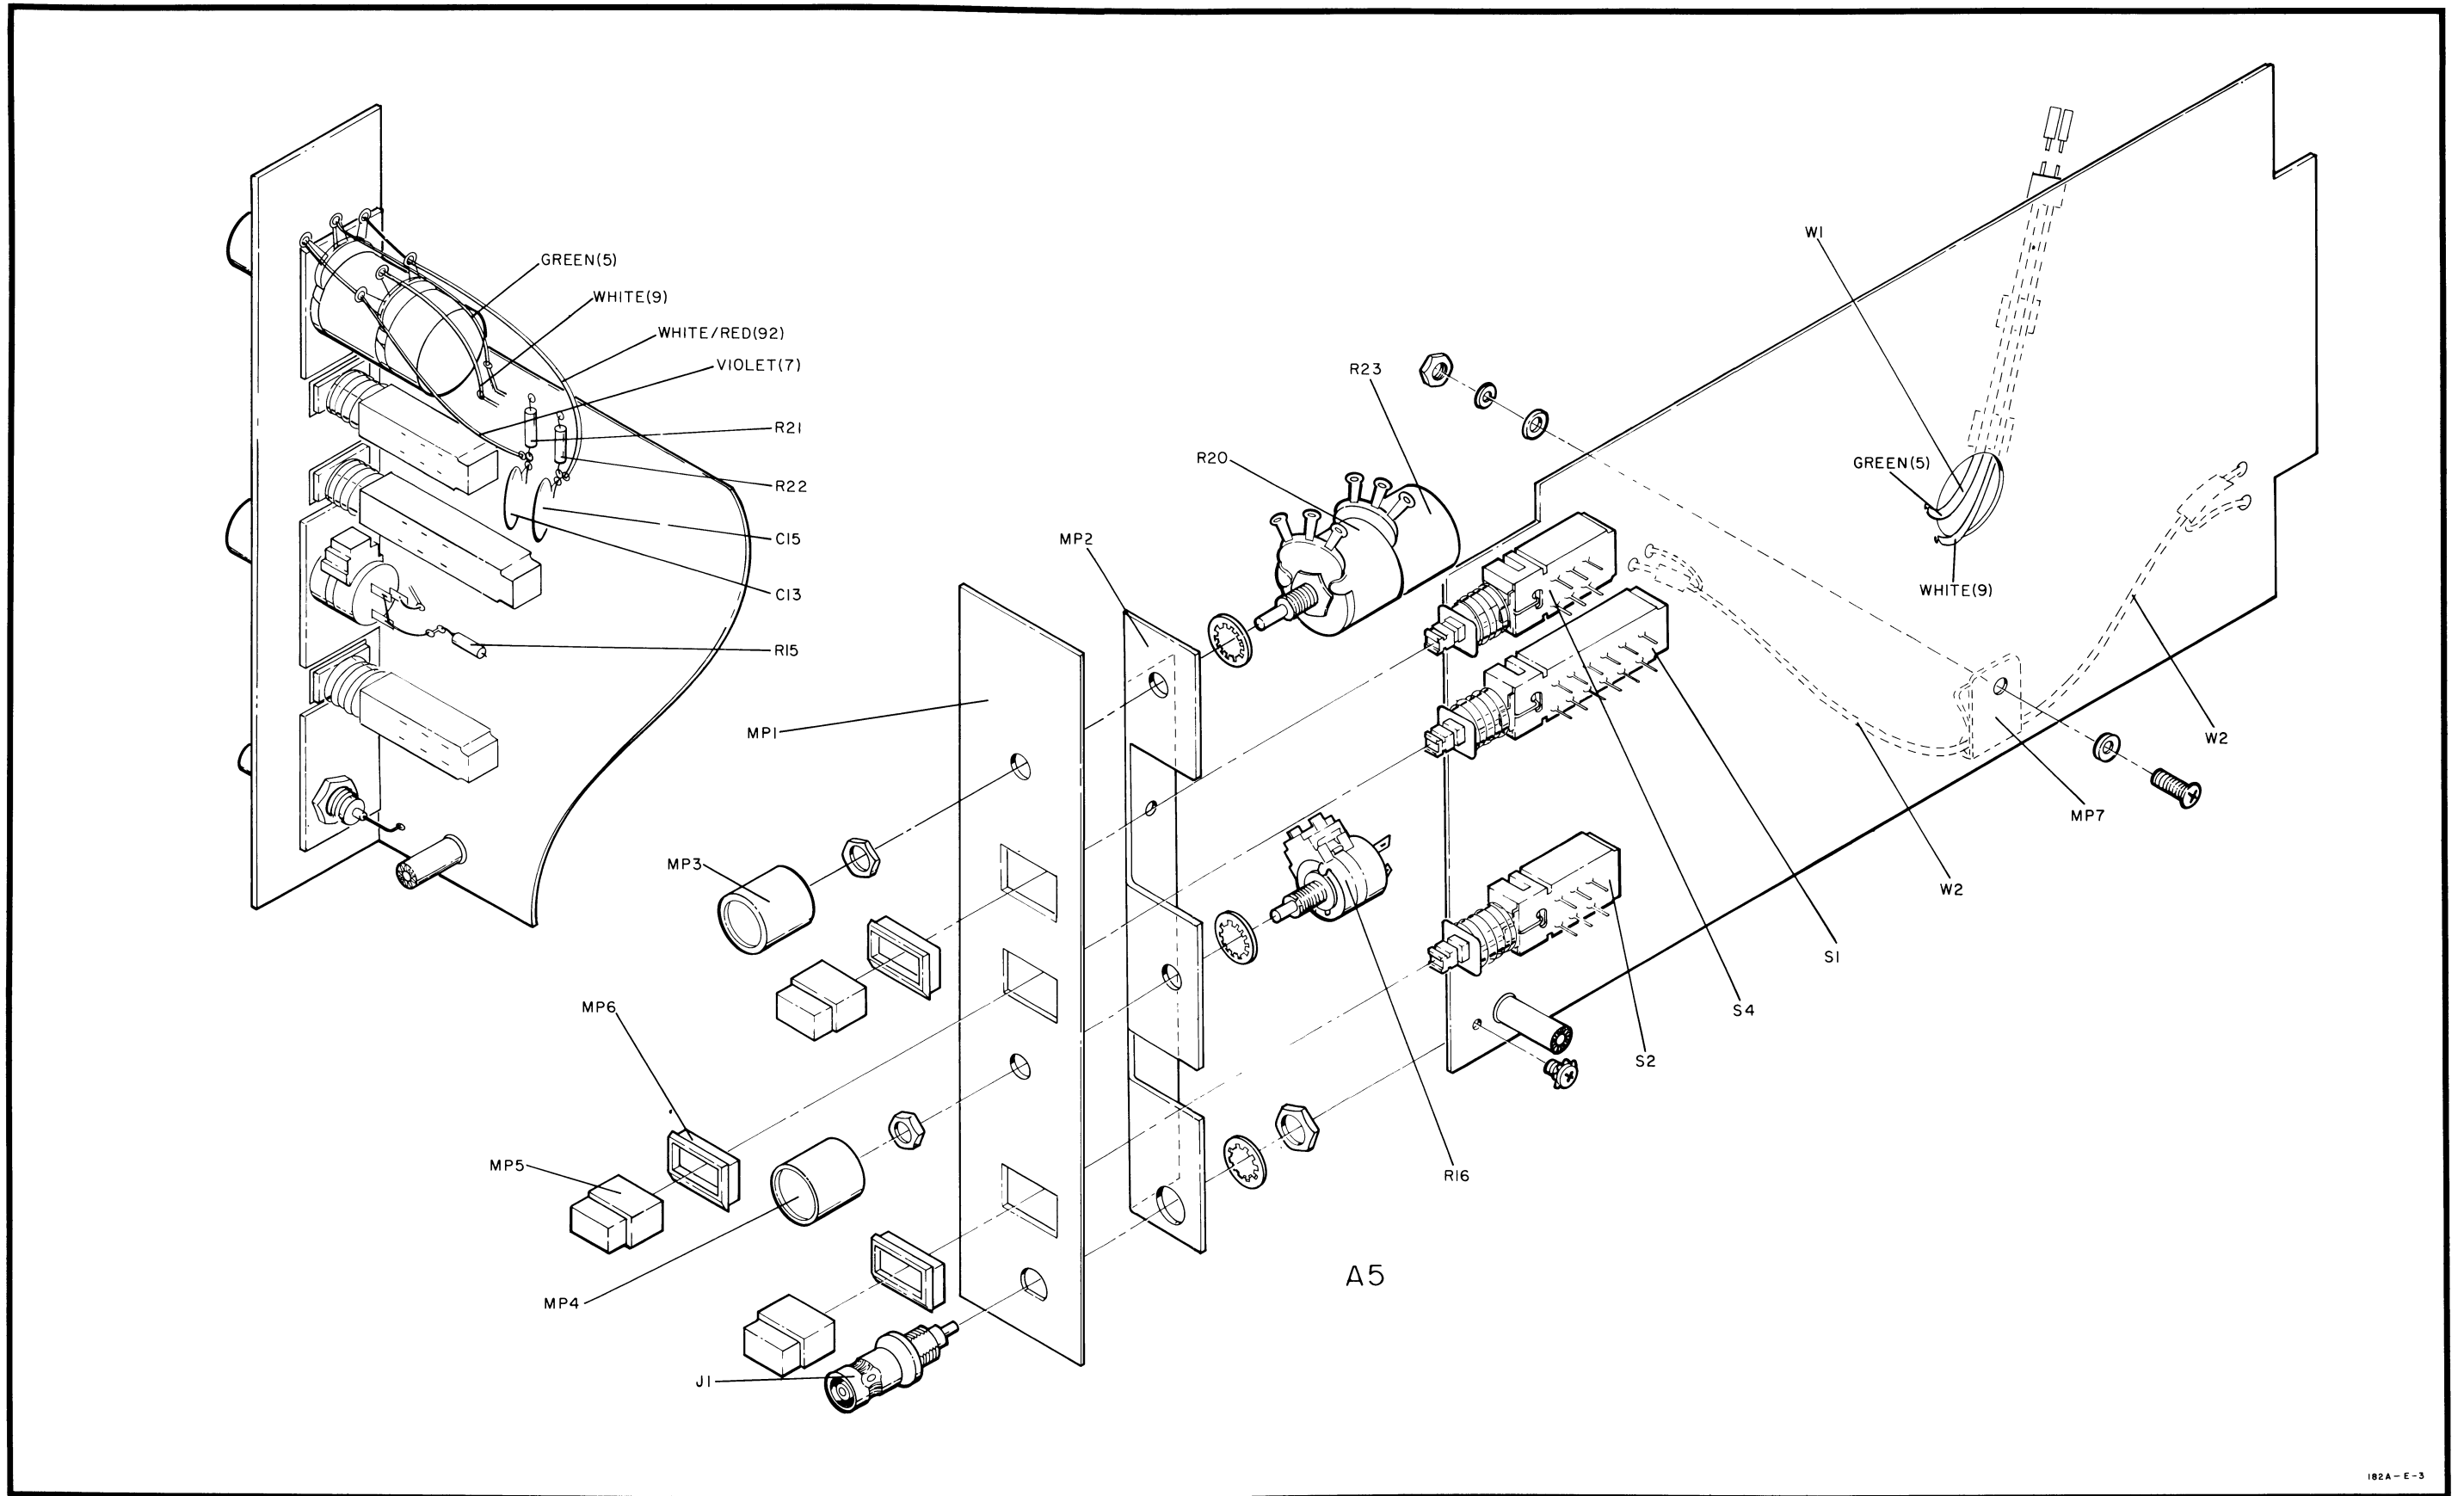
Horizontal Amplifier Module Mechanical Parts
